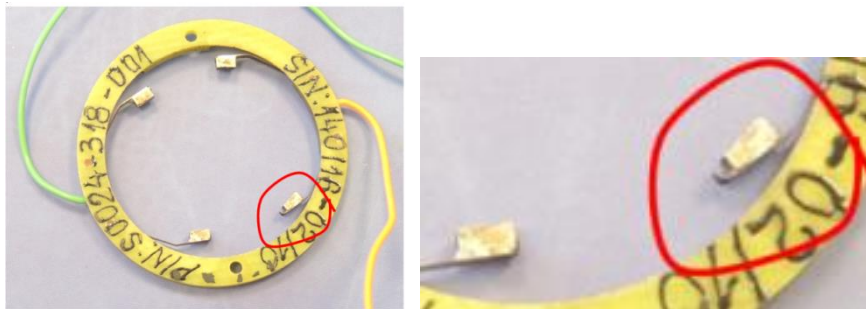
A defected brush, which was removed from a motor exhibiting brush-disconnection
